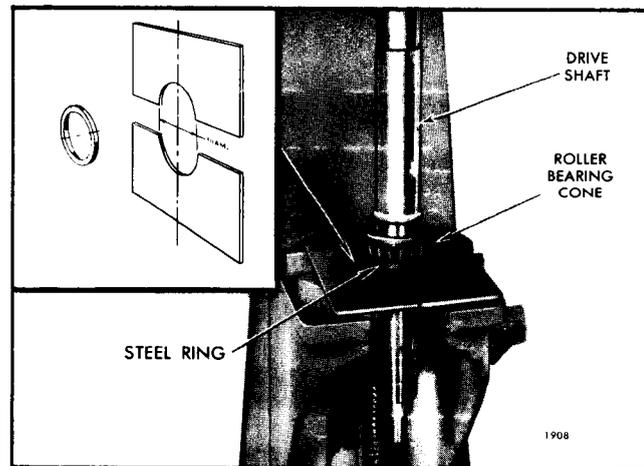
Installing Roller Bearing Cones On Clutch Drive Shaft
